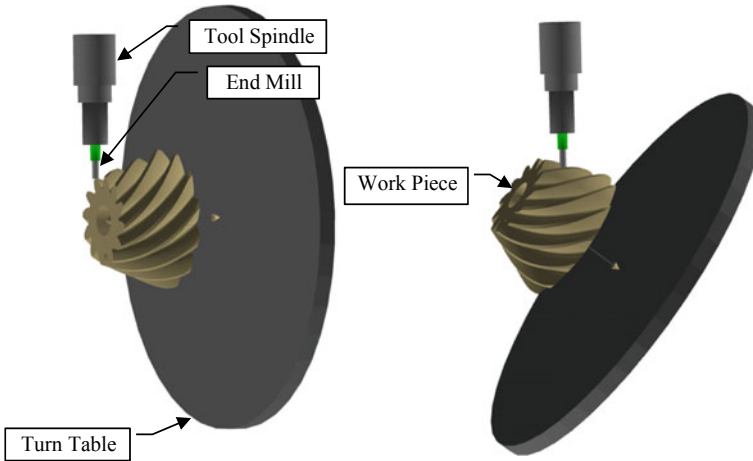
Tip chamfering with EM tip end—spiral bevel pinion
